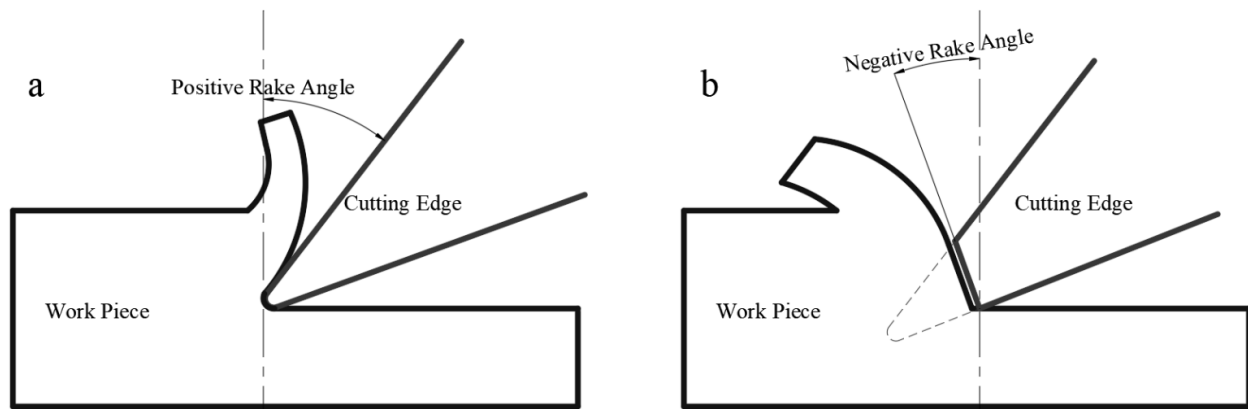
(a) Cutting edge without chipping (b) cutting edge with chipping
